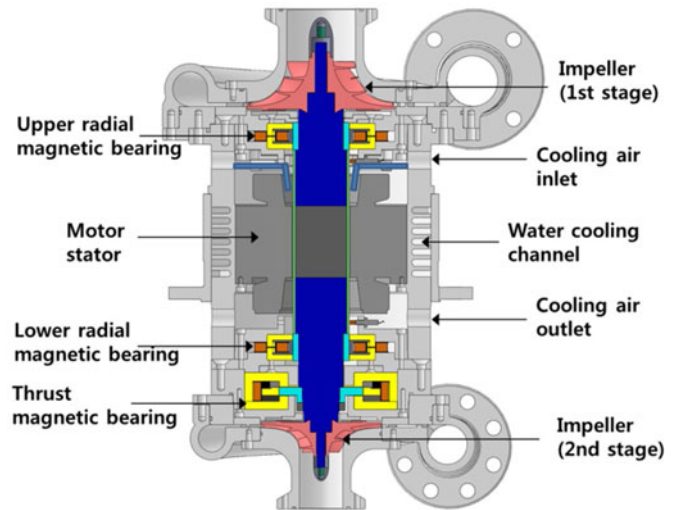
Configuration of the 225-kW, 50 000-r/min turbo compressor.
